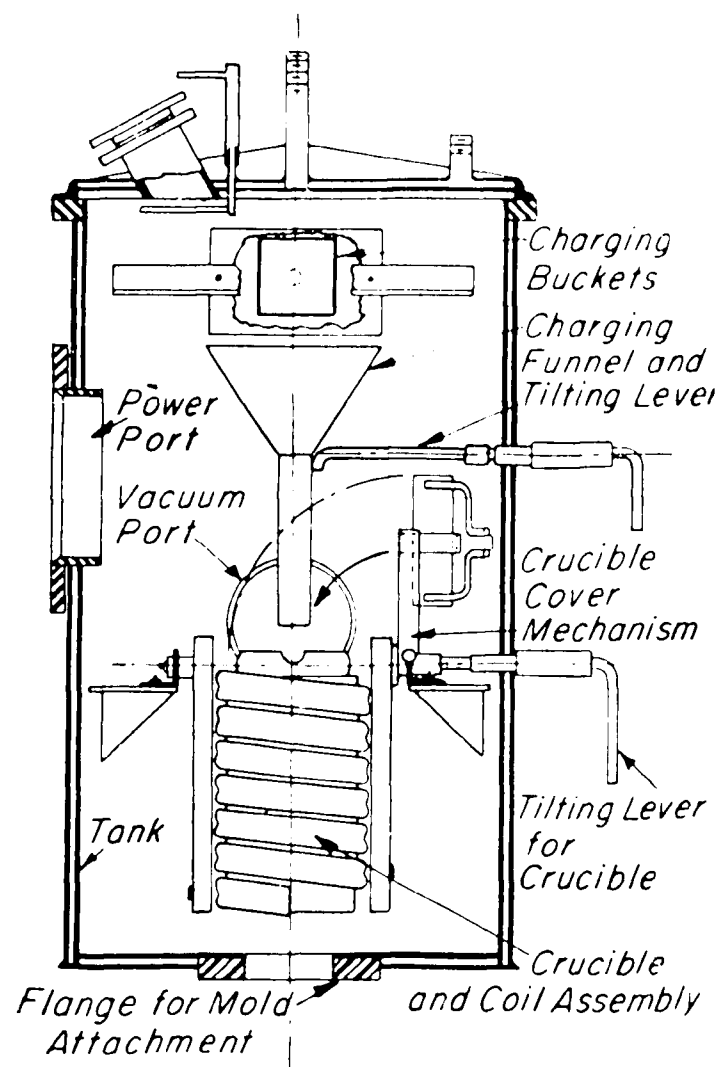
Early Unit for Tilt Pouring Into Mold Attached to Bottom of Tank
